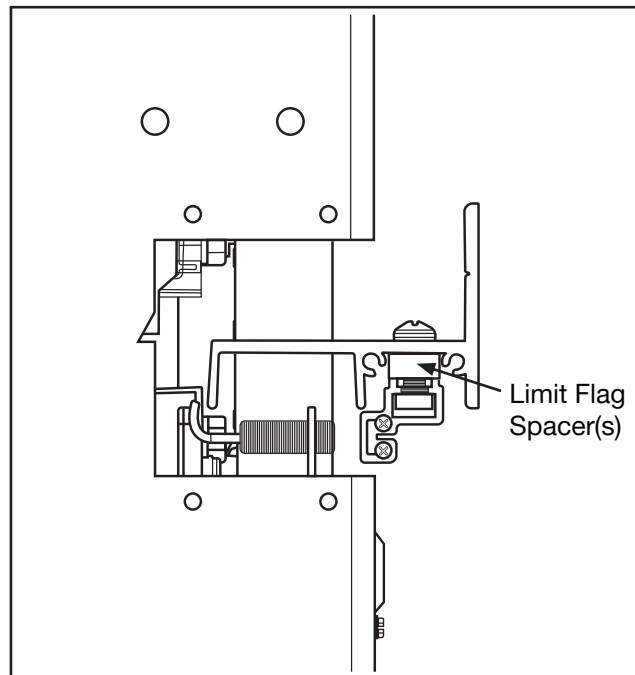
Flanged Drive Rail with Limit Flag and Spacer
